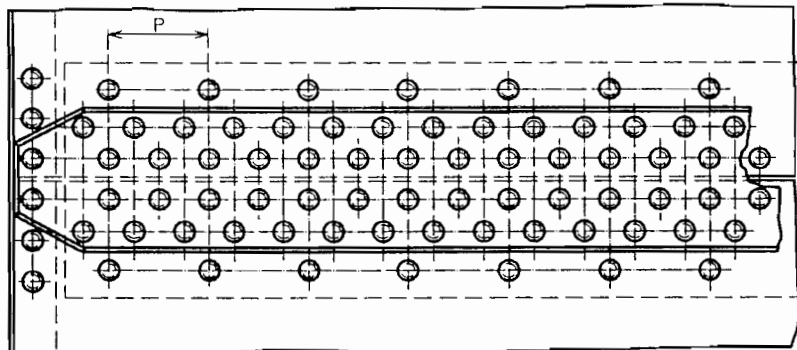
Triple-Riveted Butt and Double Strap Joint
